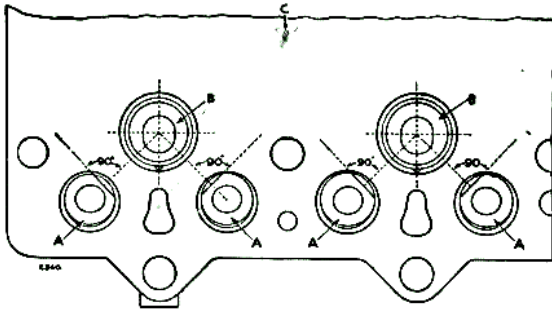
Correct position of push-rod tubes in relation to hot plugs
